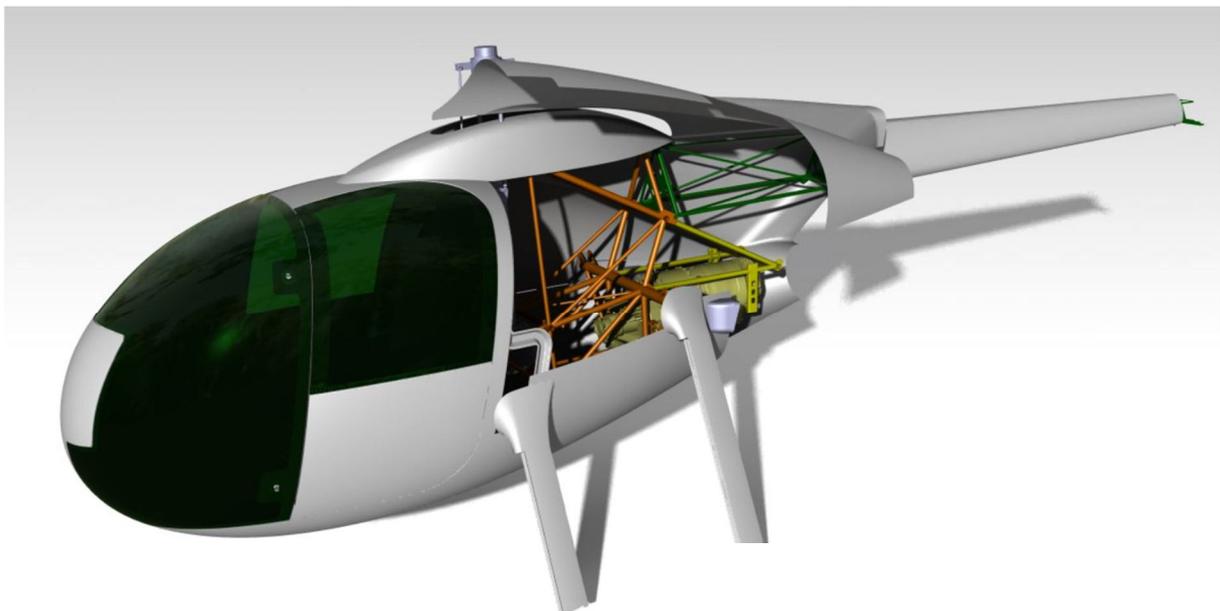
Detailed Catia view of the TS100 engine – main helicopter gearbox – chassis – fuselage B250 integration
